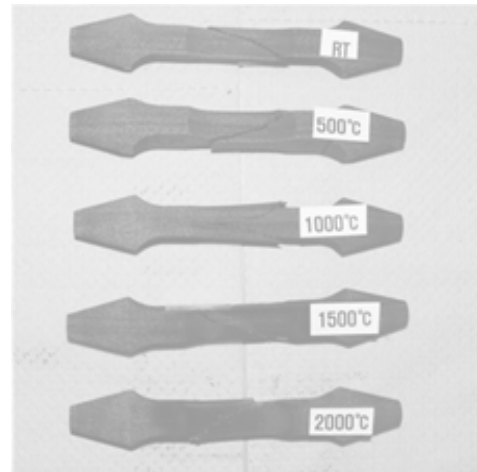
Fracture pattern of specimens after high-temperature compressive test
